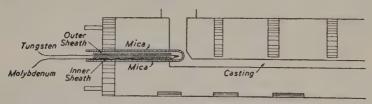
Method of Inserting the Thermocouple in the Mould.
